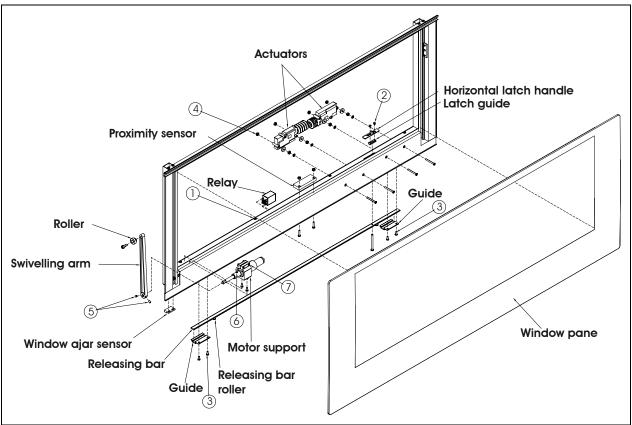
ELECTRIC AWNING WINDOW EXPLODED VIEW (SASH)
